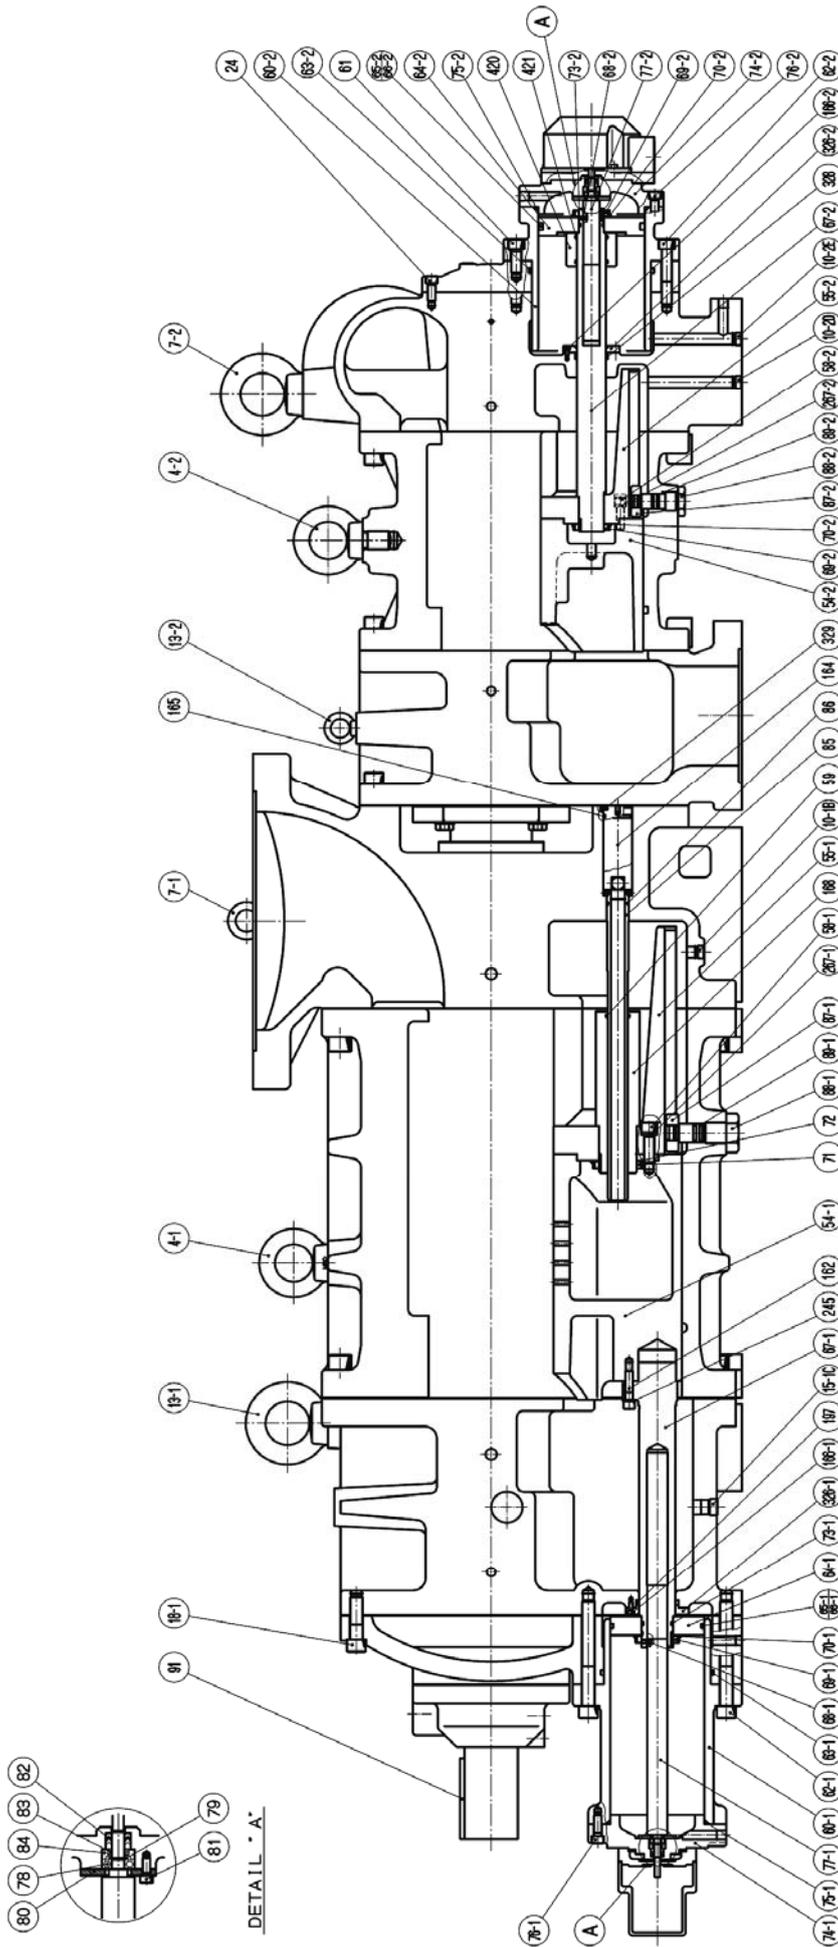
3225LLMC Assembly Sectional View (Vertical)
